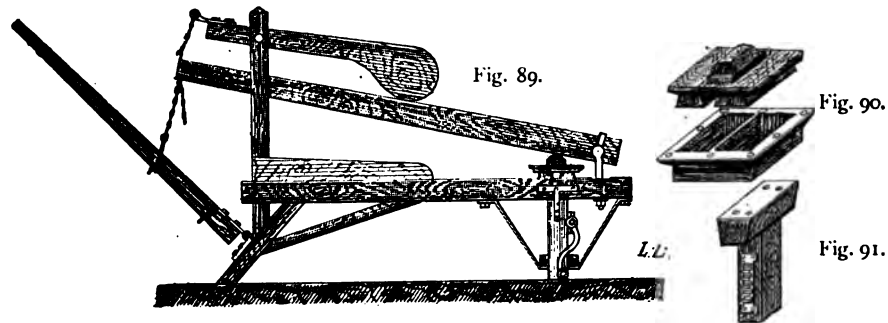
Lever Press for moulding Vegetable Moulds.
